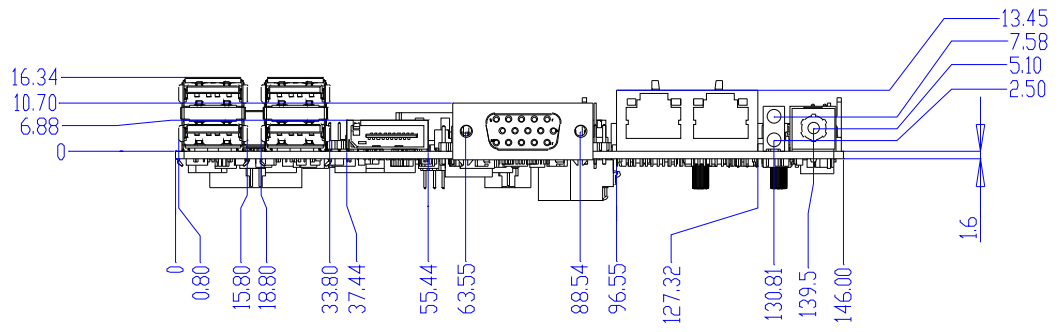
MIO-5290 Mechanical Drawing (Bottom Side)
